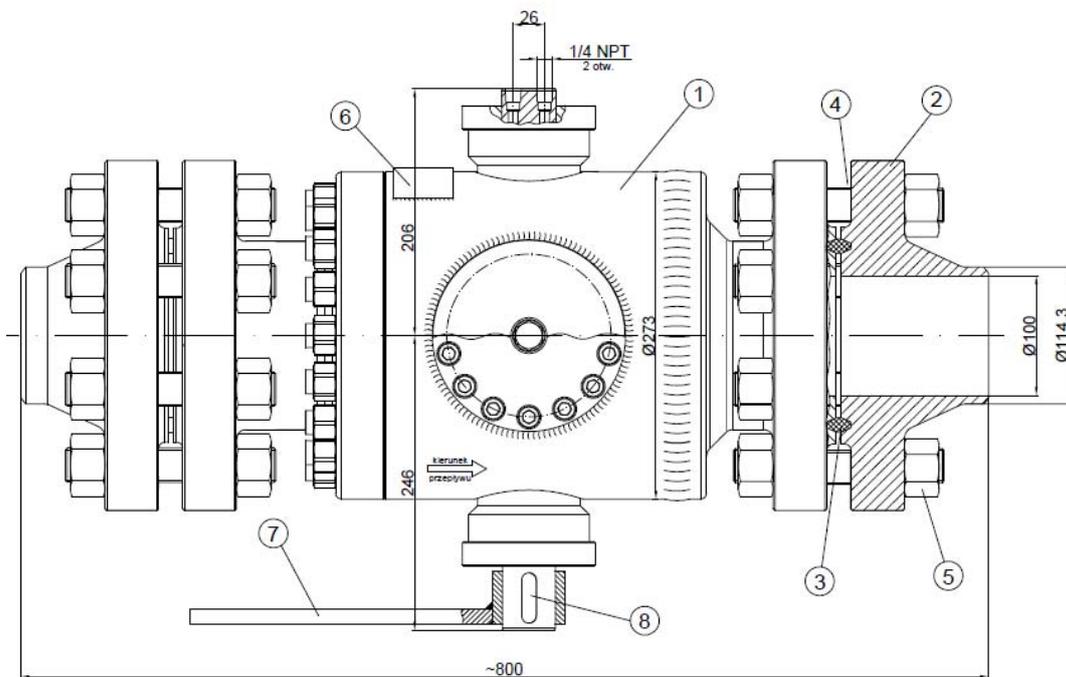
Prototype valve with built-in orifice, 1 – housing, 2 – flange, 3 – metal seal, 4 – bolts, 5 – nuts, 6 – rating plate, 7 – handle, 8 – stem key.
